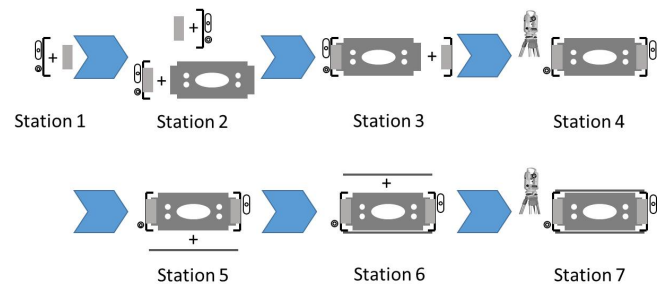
Assembly sequence of the wing-box cross-section using assembly strategy 1.
